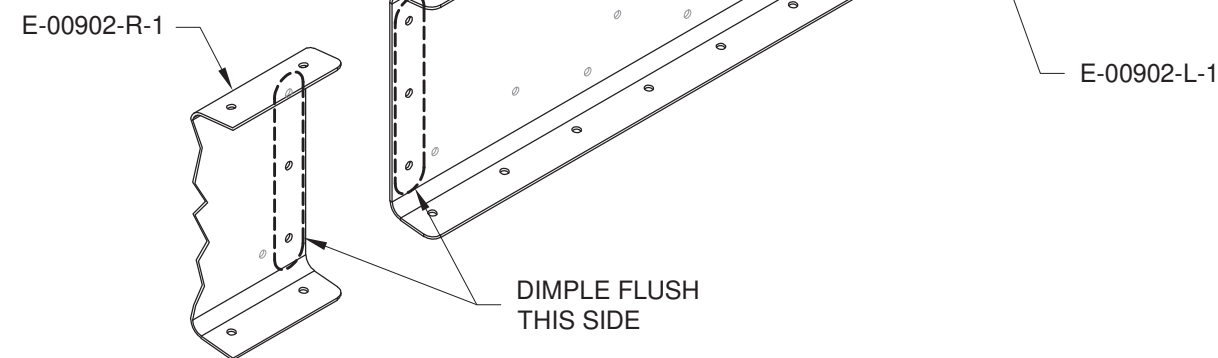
DIMPLE REAR SPAR FLANGES
